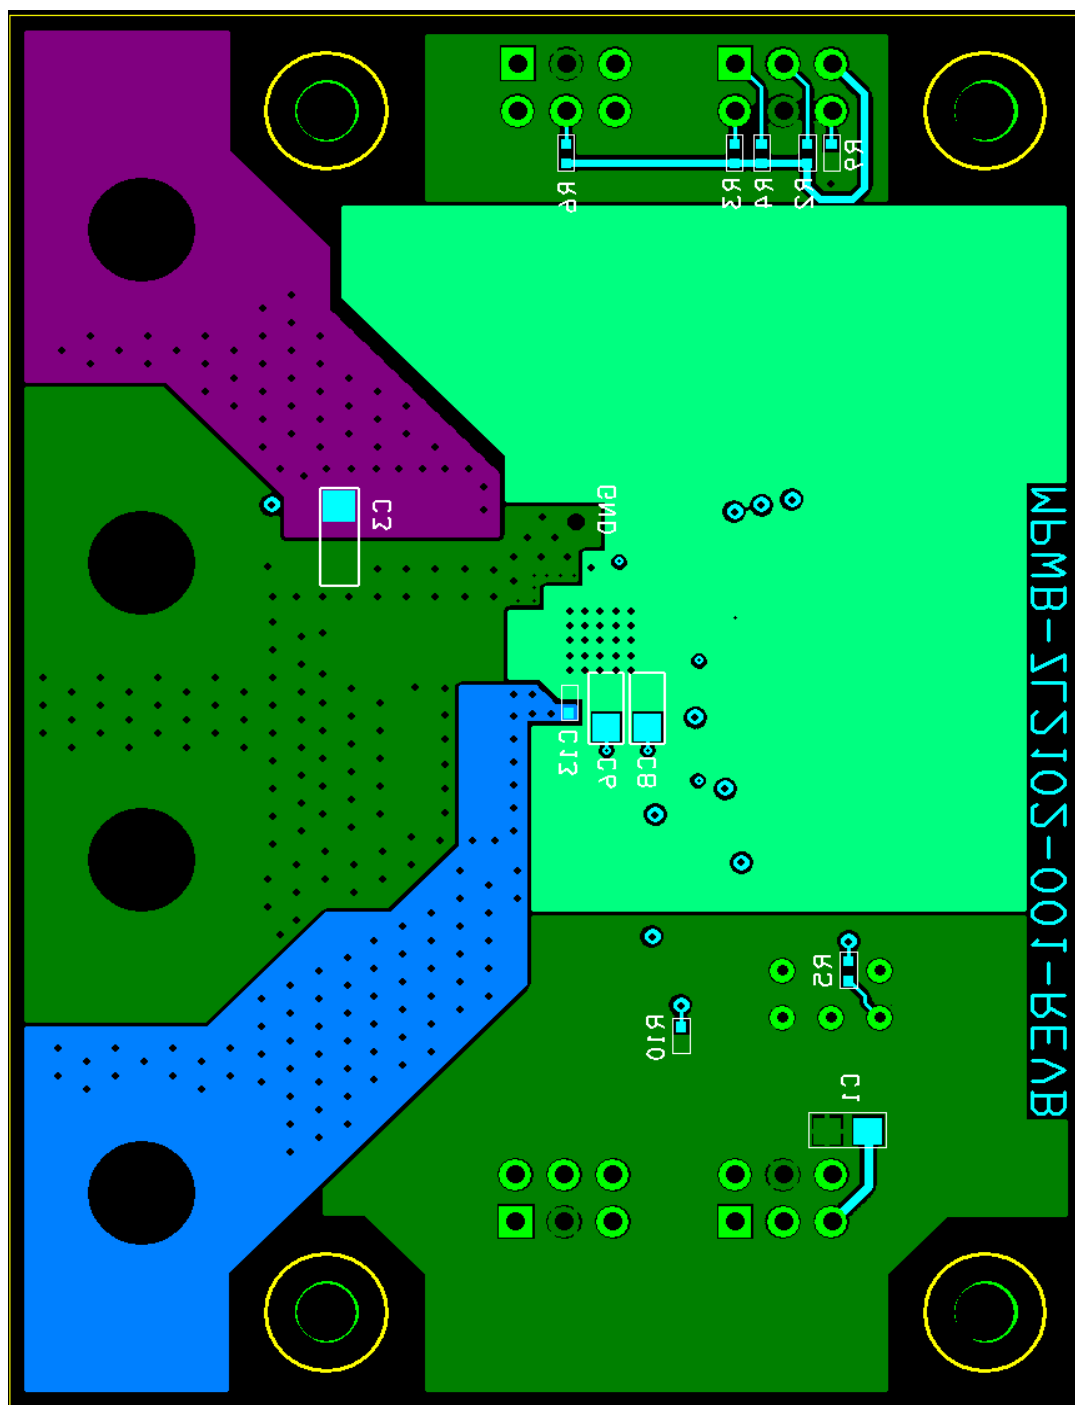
PCB - BOTTOM LAYER (VIEWED FROM TOP)
